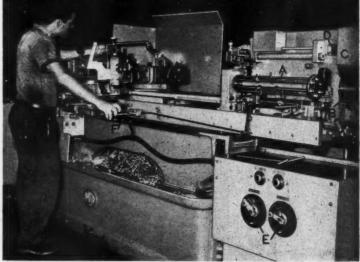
This prototype hydraulically operated, semi-automatic, turret lathe is employed in the main machine shop of the Santa Barbara works
